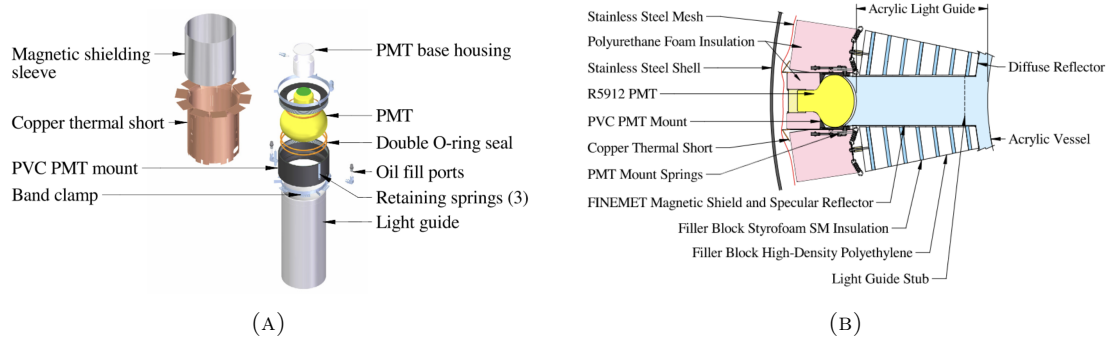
((A) DEAP-3600 PMT assembly schematic shown in exploded view and (B) within a schematic of the inner detector. Images taken from Ref [84].
